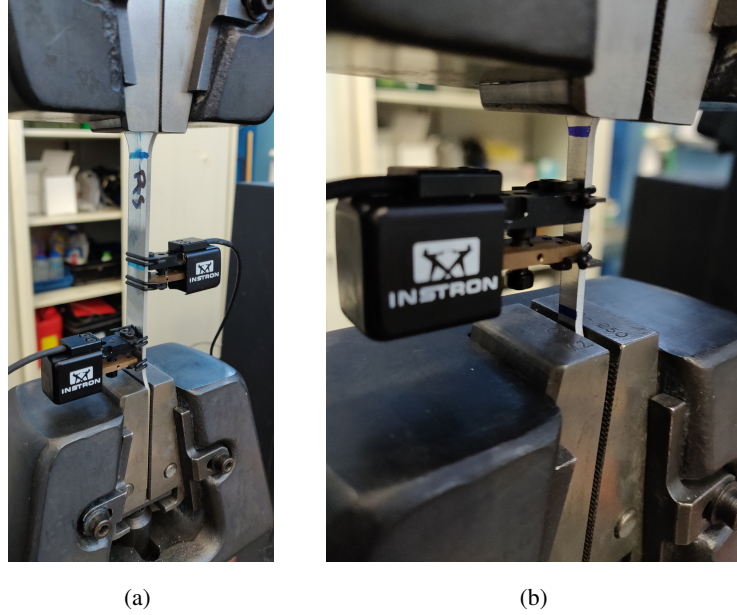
Setup for tensile tests. (a) Weld specimens (with RS on top). (b) Base material only specimens.
